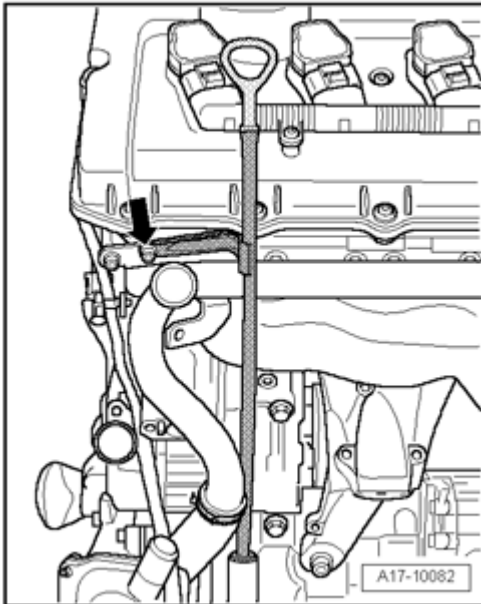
Removing Guide Pipe For Oil Dipstick At Cylinder Head
